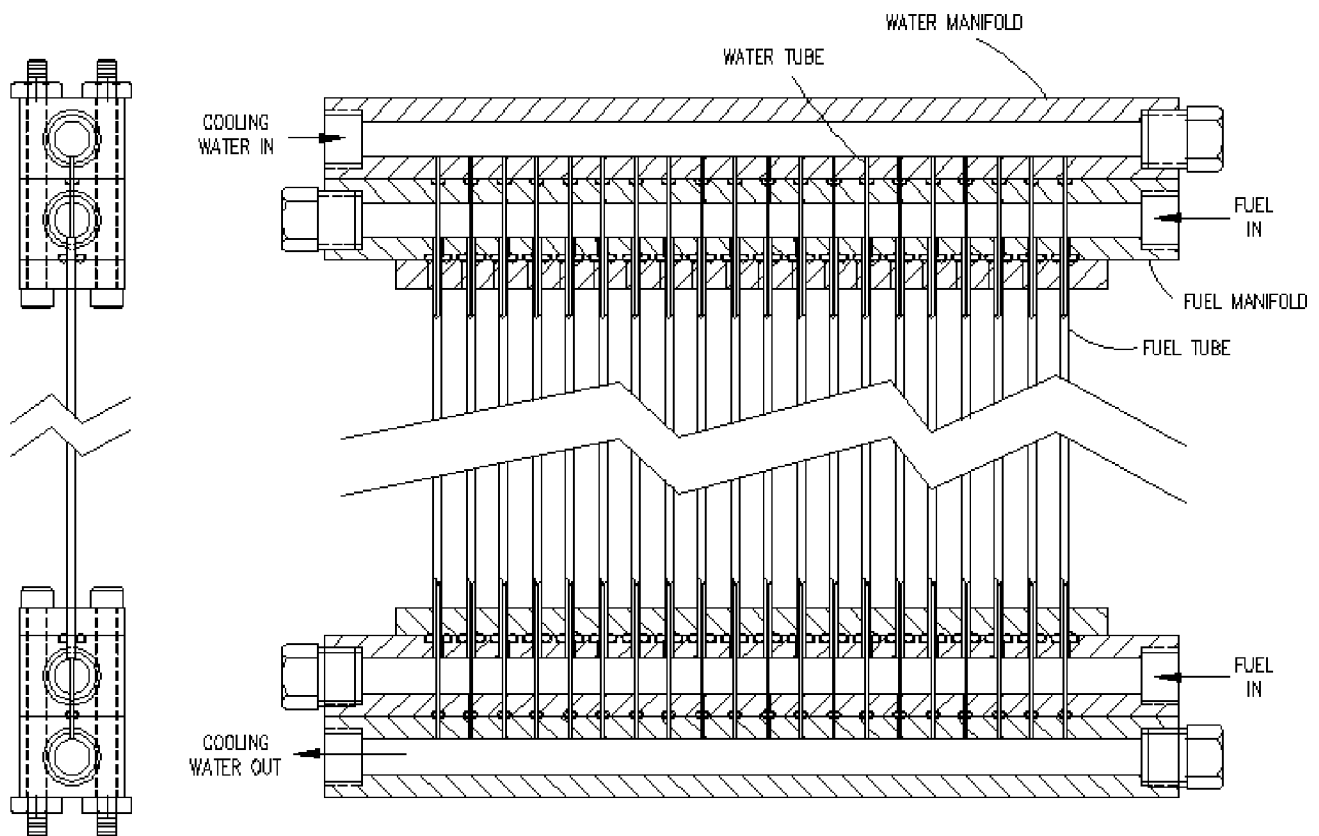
Configuration A Water-Cooled Fuel Tube Manifold Assembly
